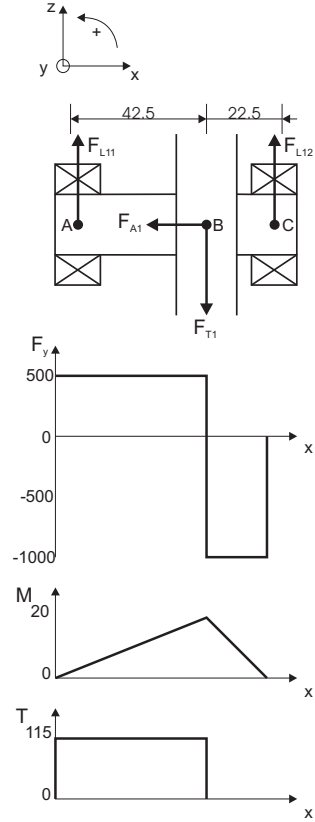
Dimensions, forces, bending moment and torque of the output shaft of the CVT
